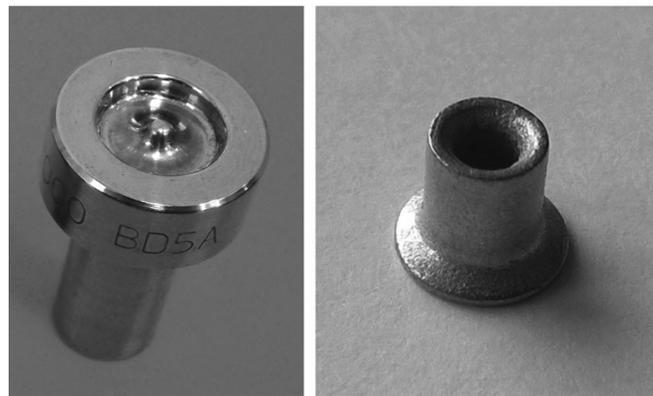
Views of die (left) and rivet (right) used in SPR joining process
